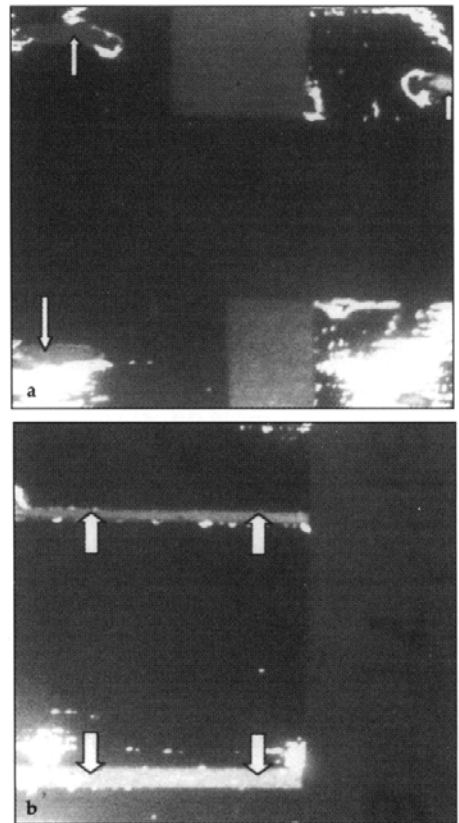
"Virgin" specimens with pieces of Metglas brazing foil having (a) holes and (b) gaps.
